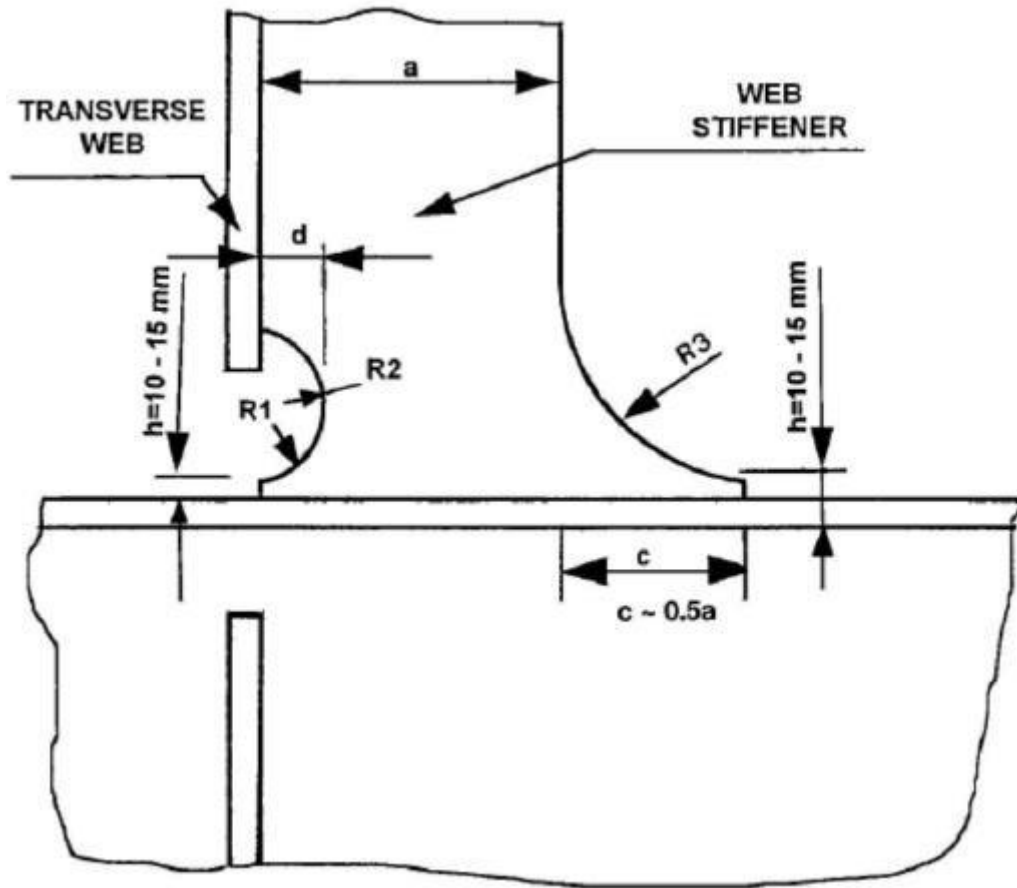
Technical Requirements for Web Stiffener in location of Web Frame / Side Longitudinal
